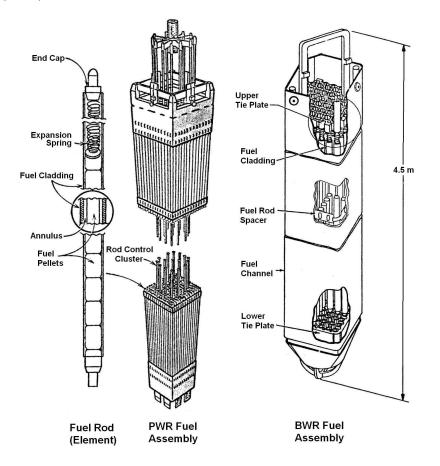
Fuel element and PWR fuel assembly (from Duderstadt and Hamilton 1976) and BWR fuel assembly (from USAEC 1973).
